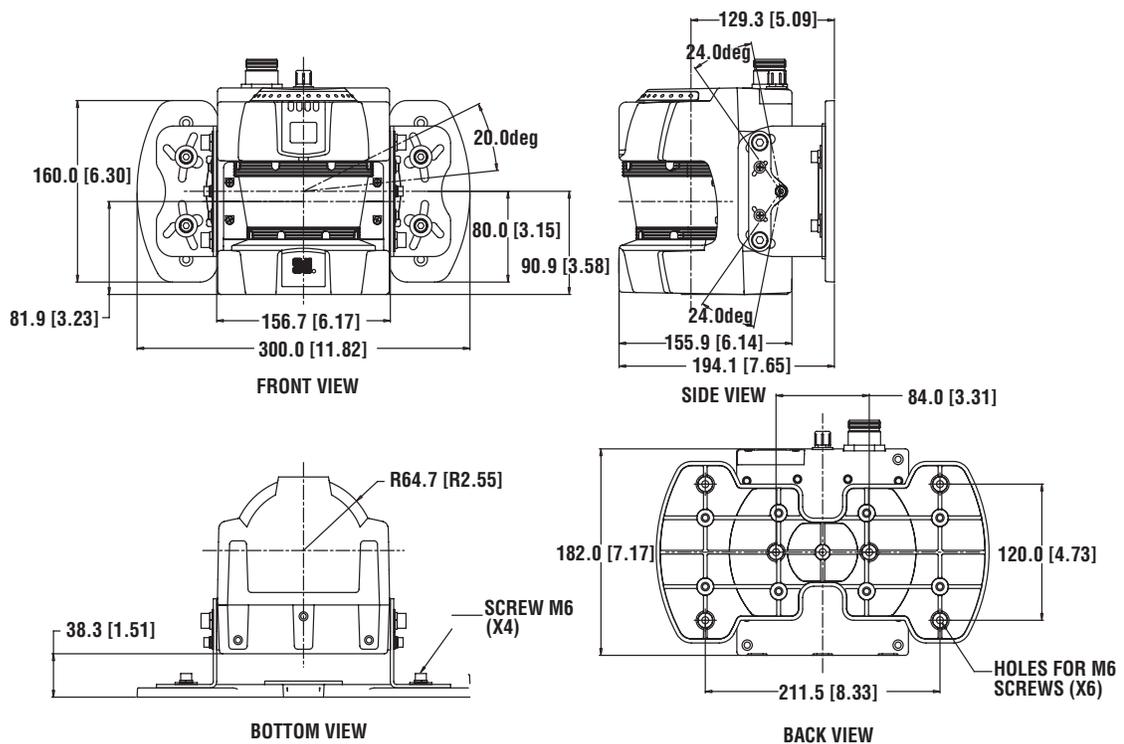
OptoShield with Bracket Kit and Mounting Plate
